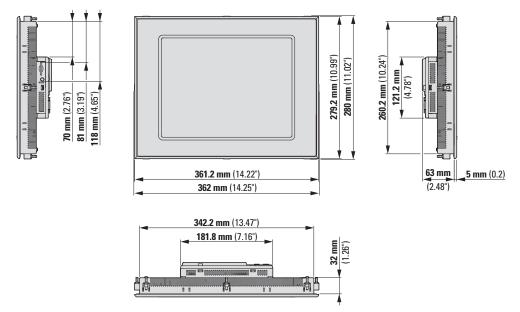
Dimensions for 10.4" front mounting devices in mm (inches)
